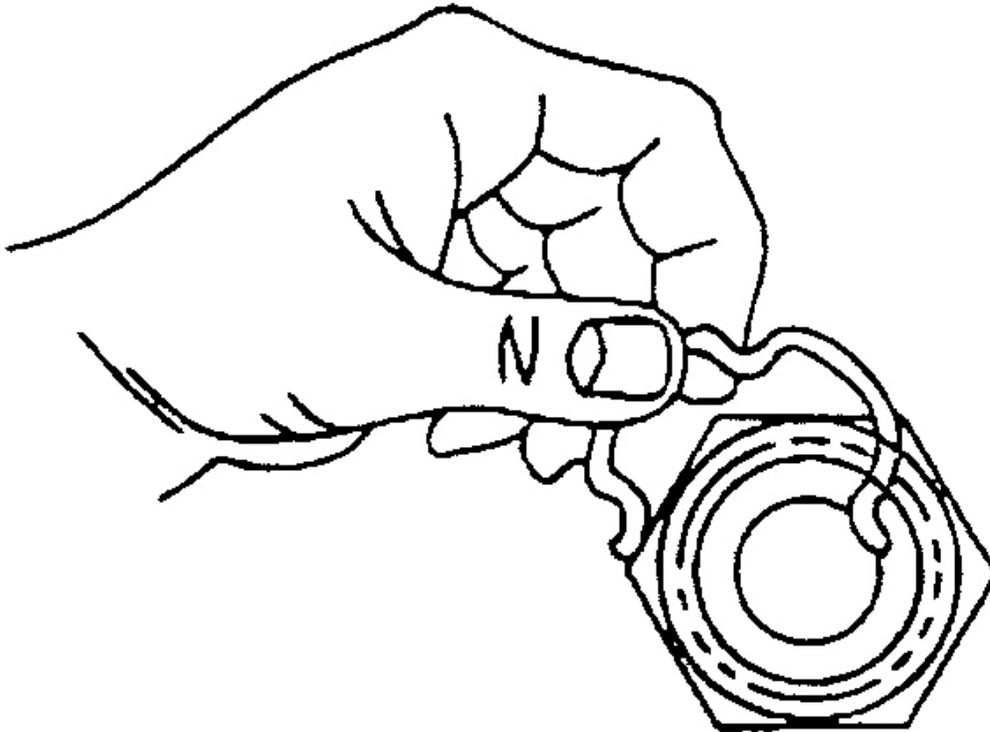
Hooking Retaining Ring Into Quick Connect Fitting
